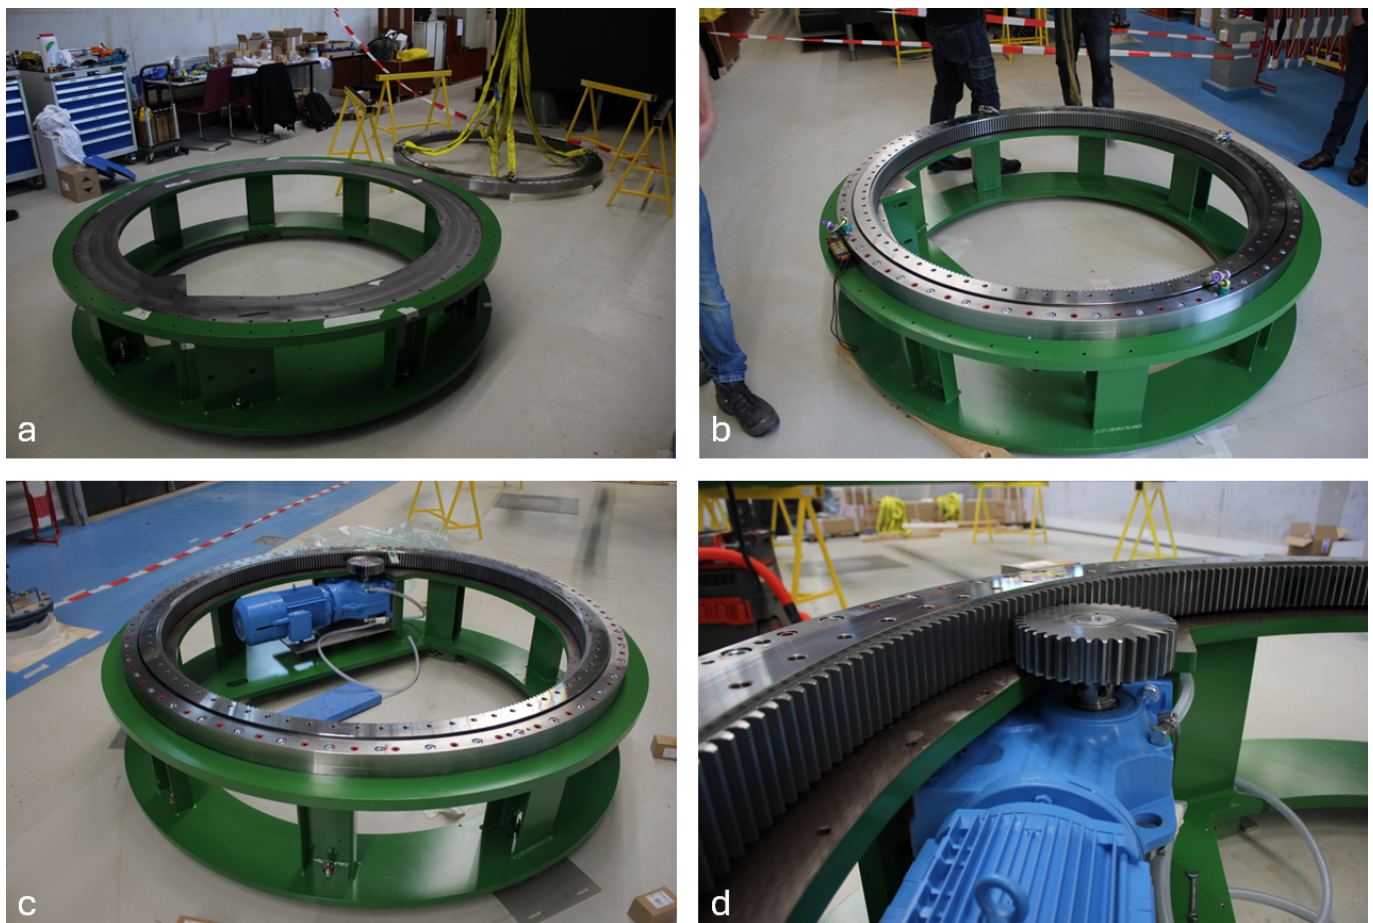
Photographs of: a) the bare base frame (*at the front*) next to the bearing (*at the back*); b) the assembled bearing and base frame, c) including the motor; and d) the motor gear head aligned with the bearing.
